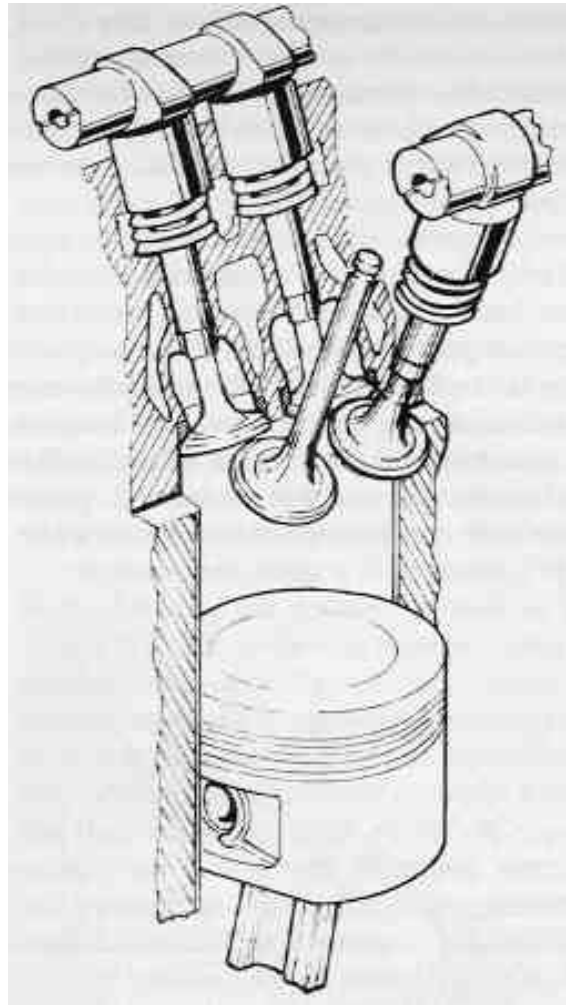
Example of a Four-Valve Pent-Roof Cylinder Head. [13]
